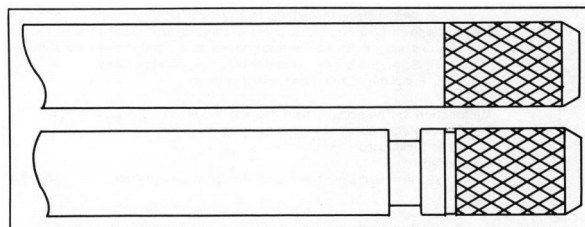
Smith and Wesson ejector rods. Top: Old style; right-hand thread. Bottom: New style; left-hand threads.
